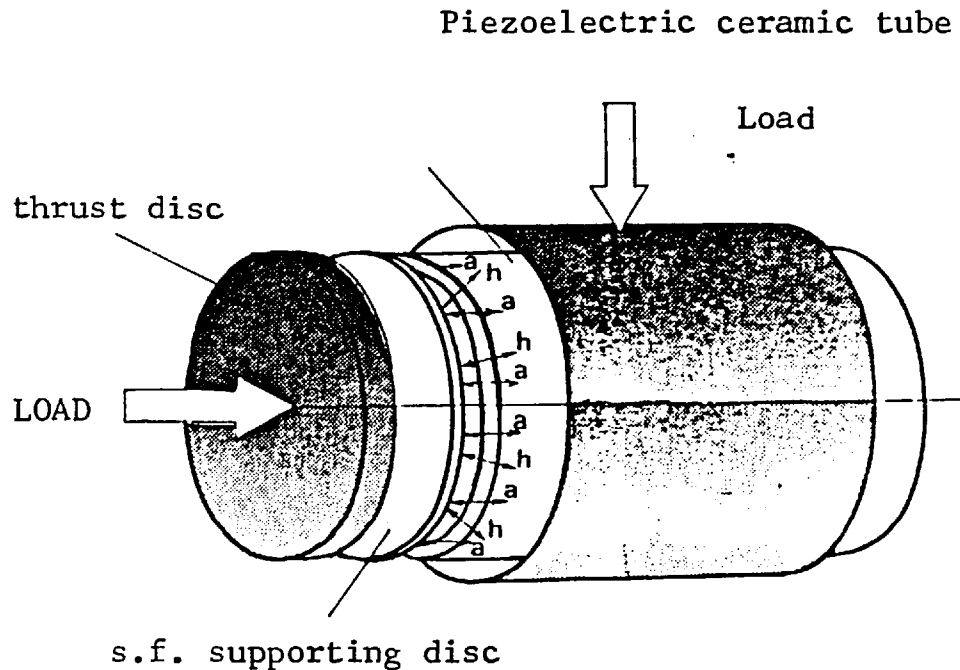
Combined journal and thrust squeeze film bearing with axial (a) and radial, 'hoop', (h), motion.
